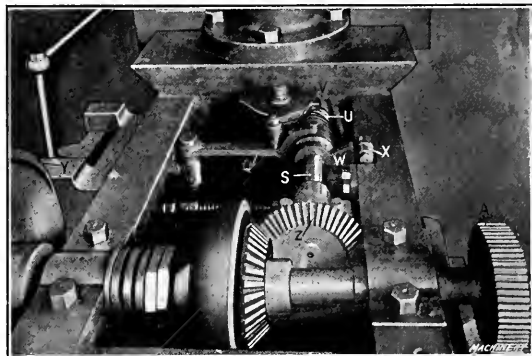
Close View showing the Indexing Mechanism located under the Table which has been removed
